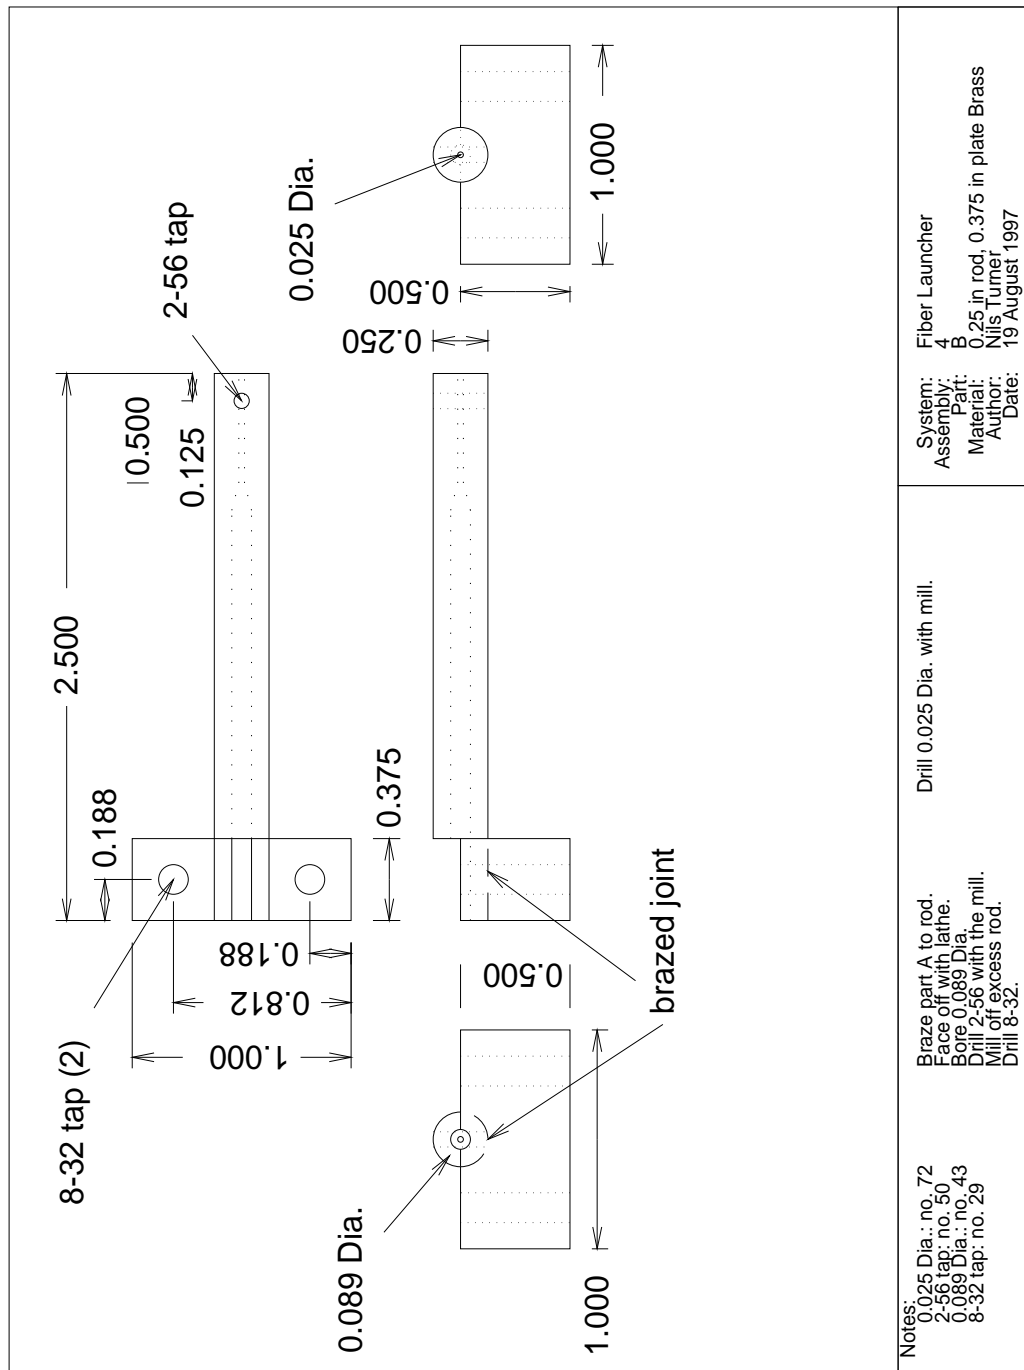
Fiber Launcher, Part 4B*. This part is a piece of the strand cable clamp. It gets brazed to *Part 4A*.
